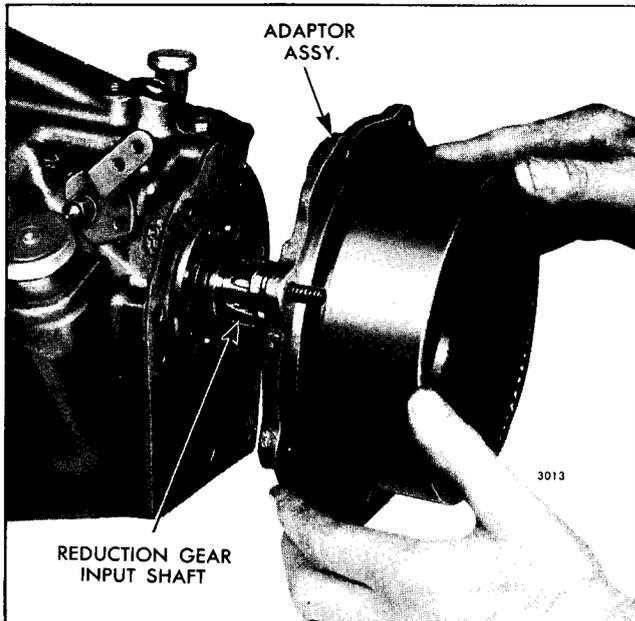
Removing or Installing Reduction Gear Adaptor, Planetary Ring Gear Plate and Ring Gear Assembly from/to Reverse Gear Housing (2.5:1 and 3:1 Ratios)
